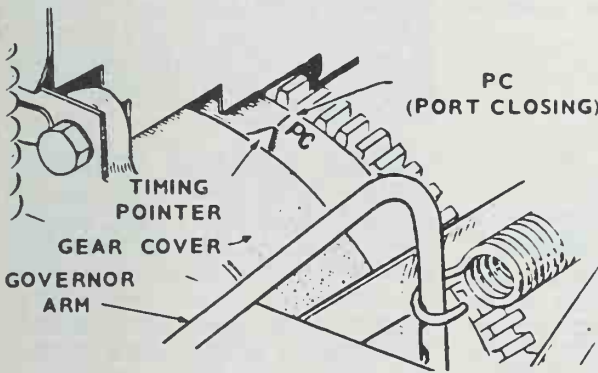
Port closing injection timing mark is stamped on margin of diesel engine flywheels. Numerical value in degrees BTDC may be shown. Refer to text.
